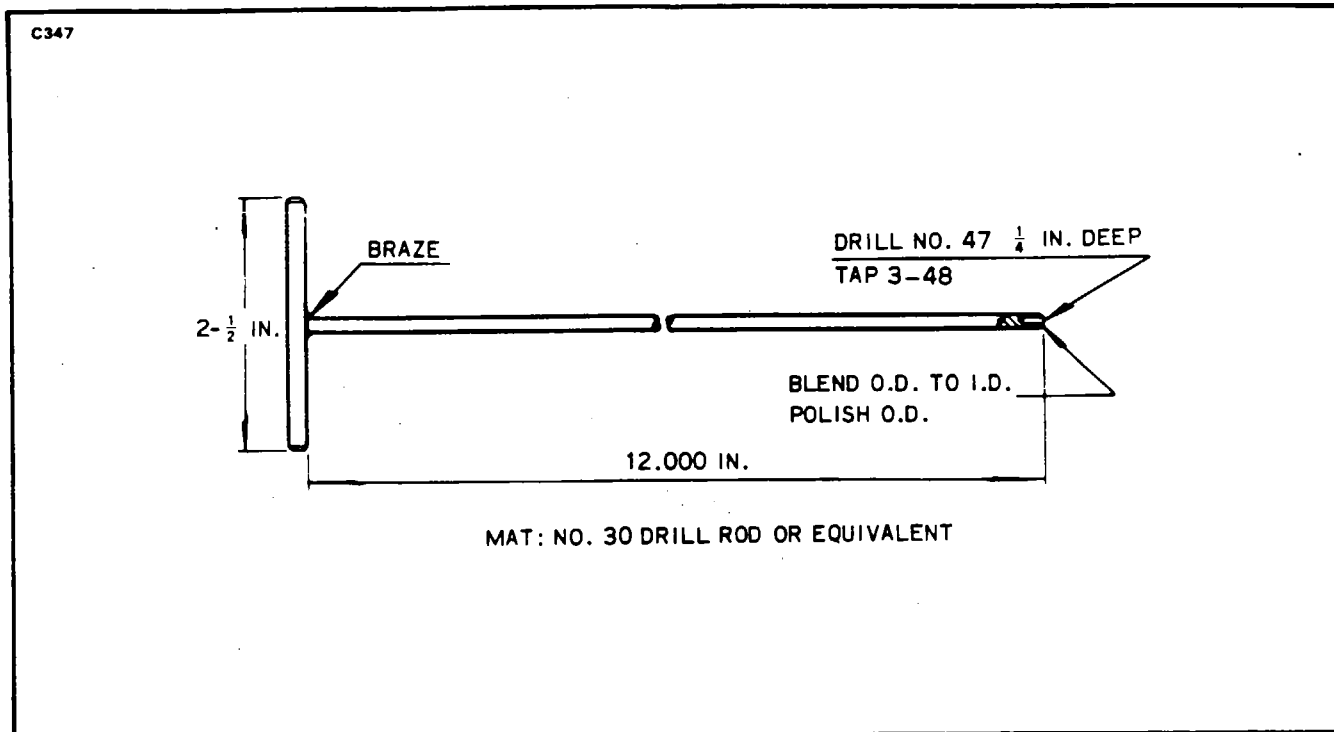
Assembly Tool - Ignition Harness Insulating Sleeves
